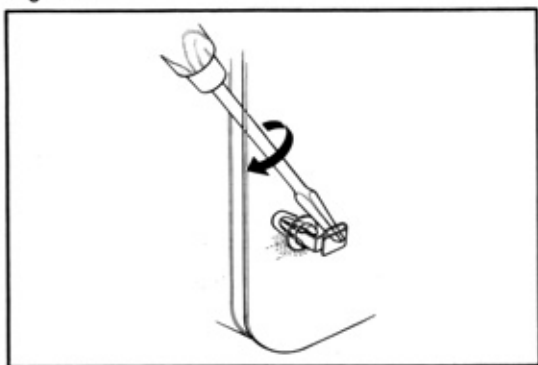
REAR DOOR TRIM REMOVAL
